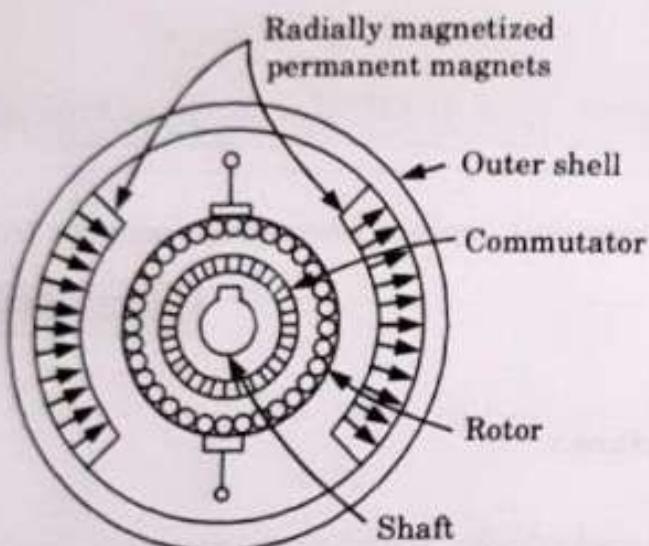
Cross-sectional view of a PMDC motor.
